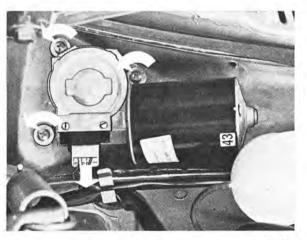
Installing cable for drive link and parallel drive link, lett-hand side
